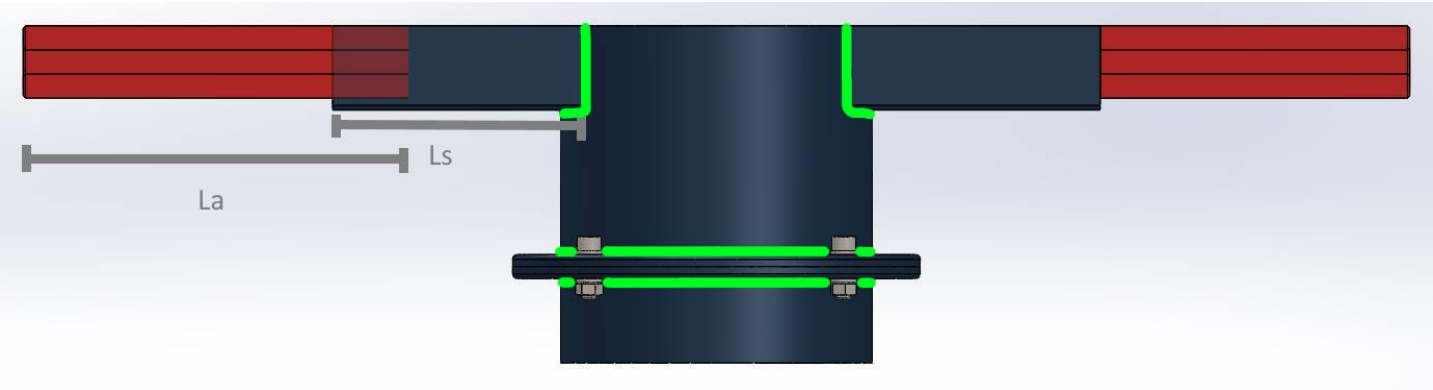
Side view on the arm system with emphasized welds.
